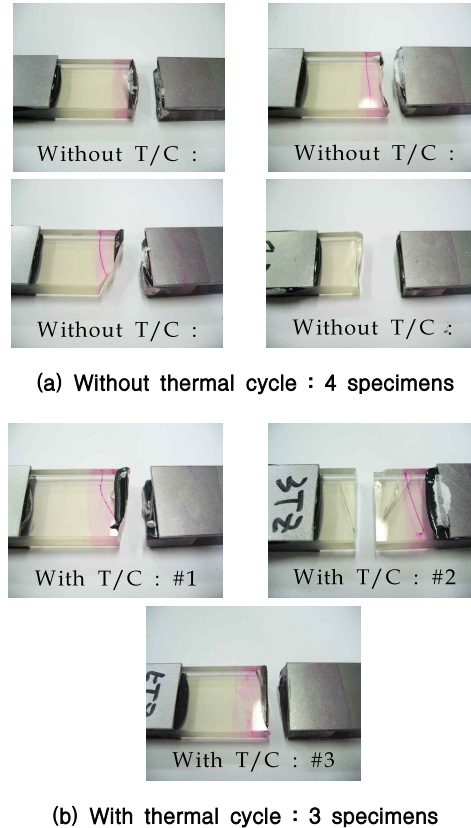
Fracture mode of Zerodur-steel specimen : Adhesive B
